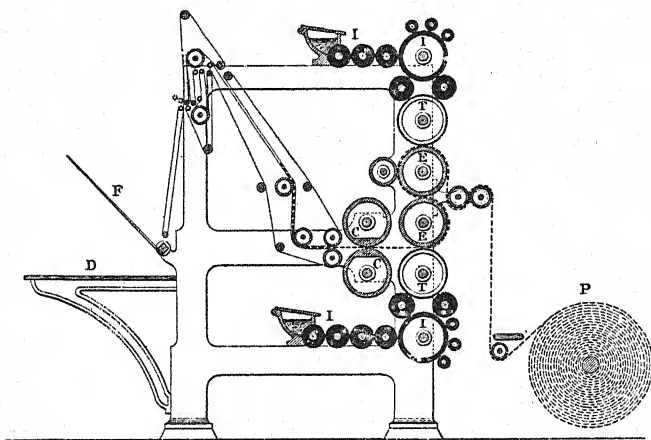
THE MARINONI SINGLE REEL ROTARY MACHINE.
